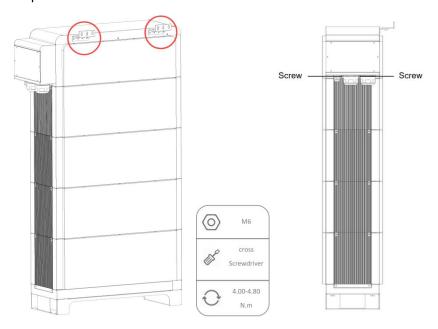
Mounting A position & Side panels connected to the main control
